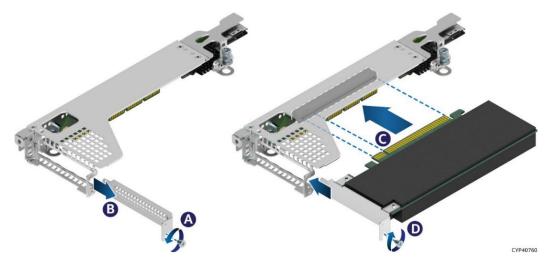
PCIe* add-in Card Installation for Riser Card on Riser Slot #2
